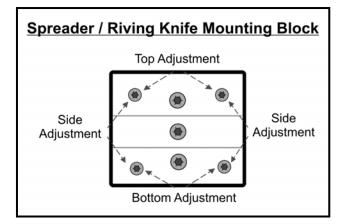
Pairs of adjusting screws for spreader/riving knife position
